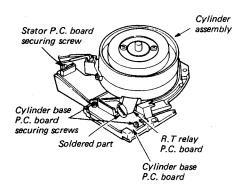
Relay P.C. board and cylinder base P.C. board
